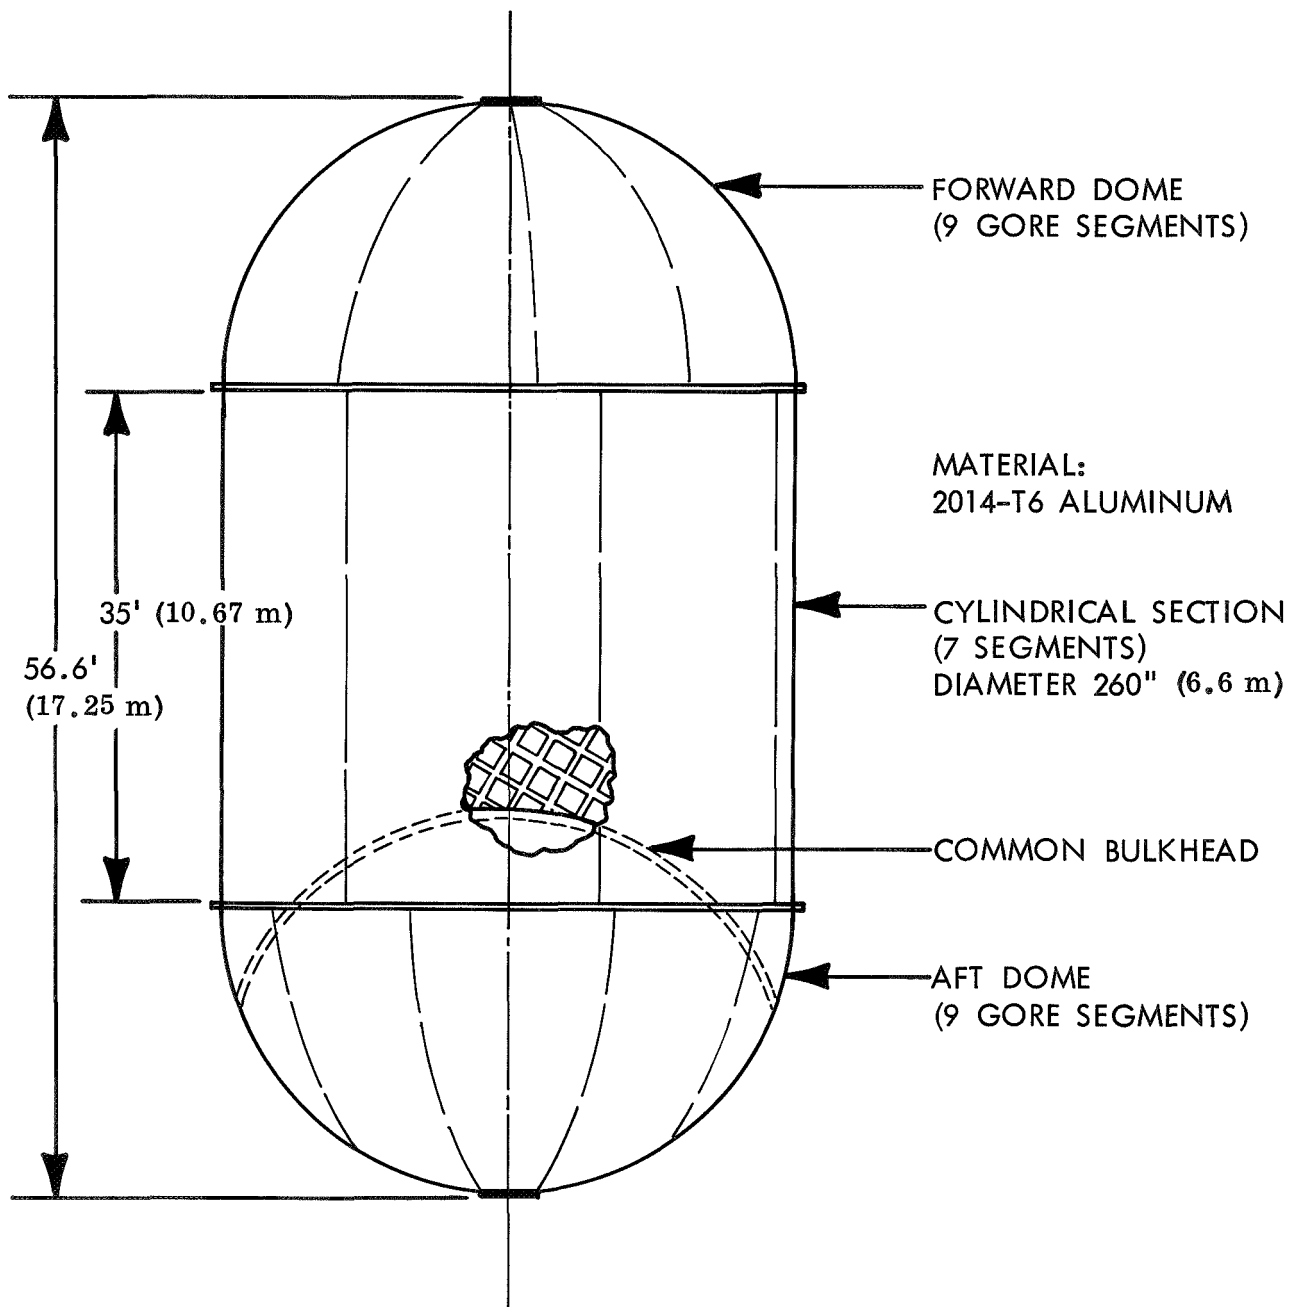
Propellant Tank Structure (Structural Element No. 2)
